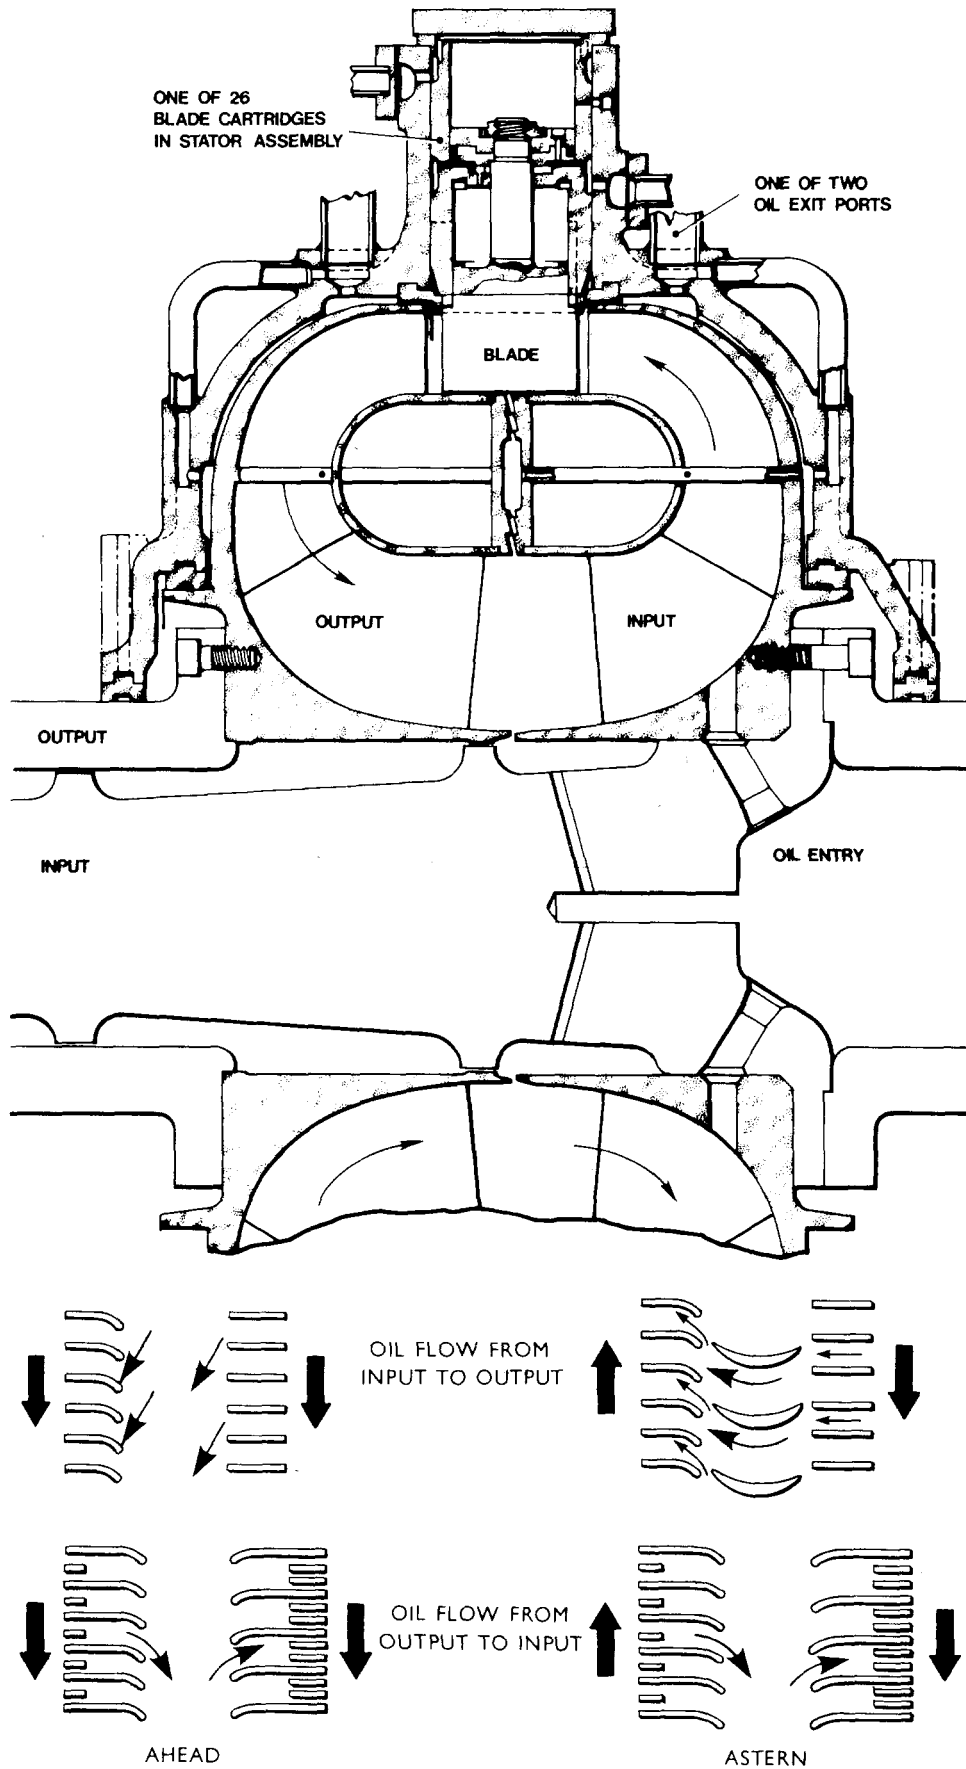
FRANCO TOSI HYDRAULIC REVERSING COUPLING (SHOWN IN ASTERN RUNNING POSITION)
